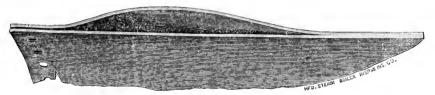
LAMINATED PLATE CUT FROM A STEEL BOILER.
